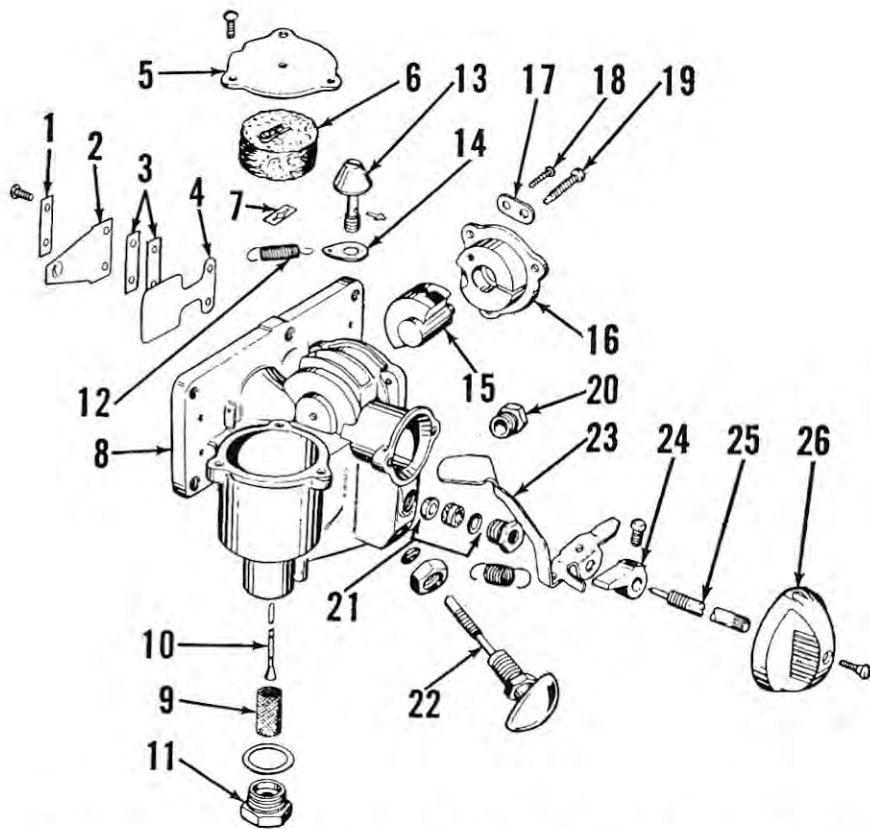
Exploded view of carburetor used on models 5S11 through 5S14. 5D11 is similar except that shut-off needle (22) is not used.
